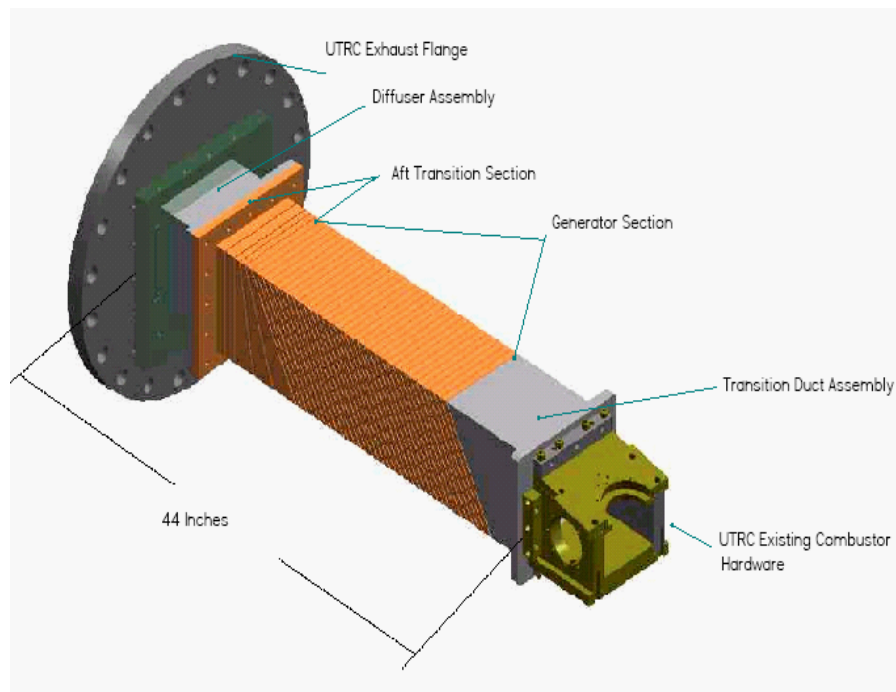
Assembly Layout of the MHD Generator and Mating Flow Path Components
